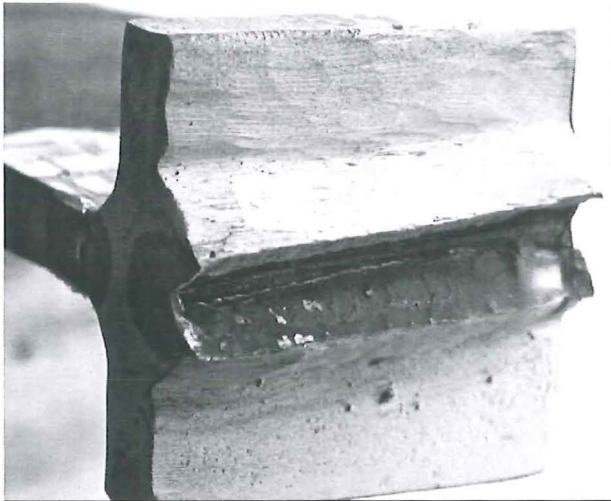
, 29.7 and 29.8: Test specimen during the test and after failure of the weld.
